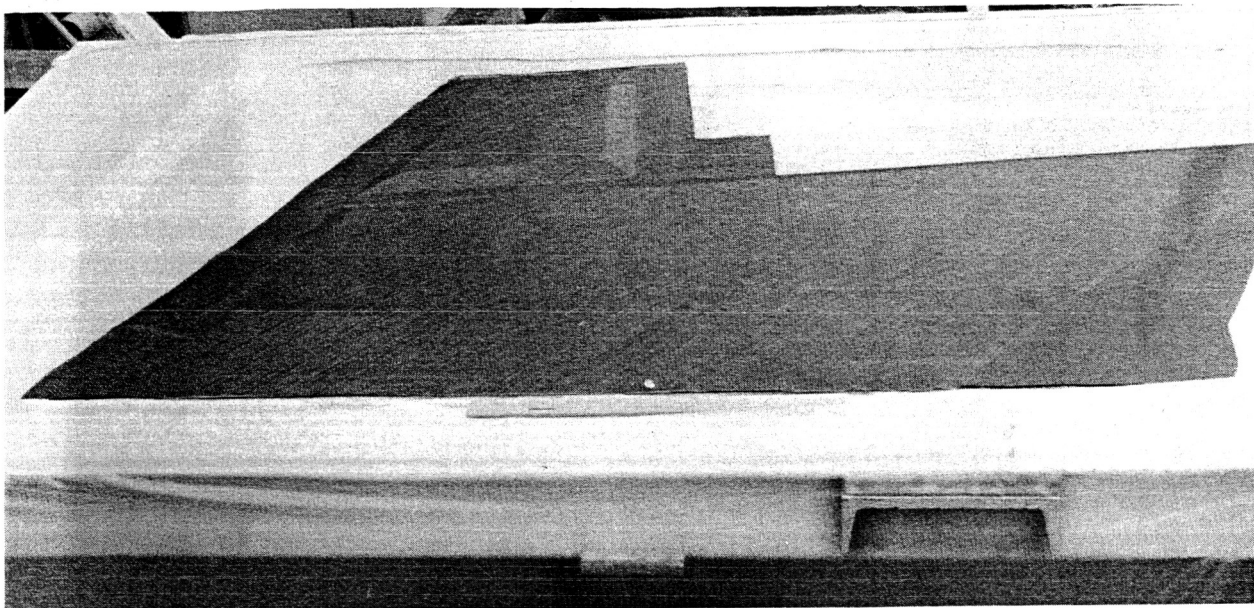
Lightning Strike Panel Showing Completed Layup Ready For Bagging
